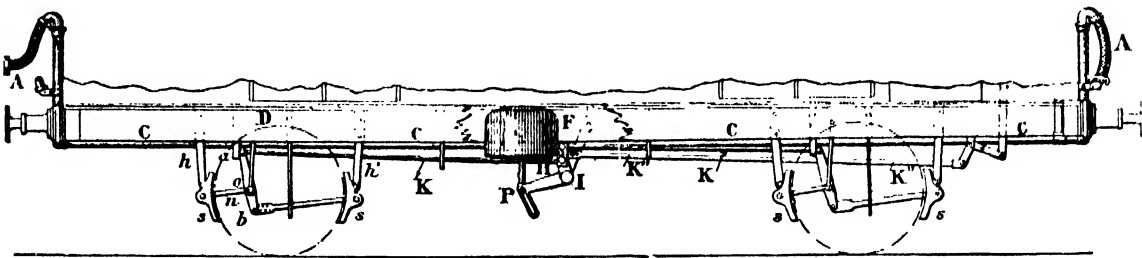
Arrangement of Vacuum and Hand Brake Gears
